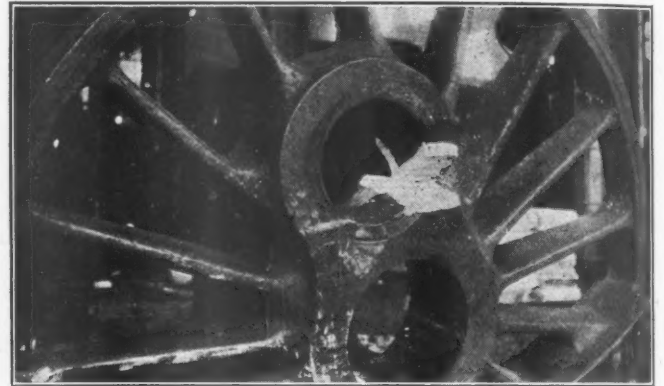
Wheel Center Cracked Through Crank Pin Hole Ready for Welding
